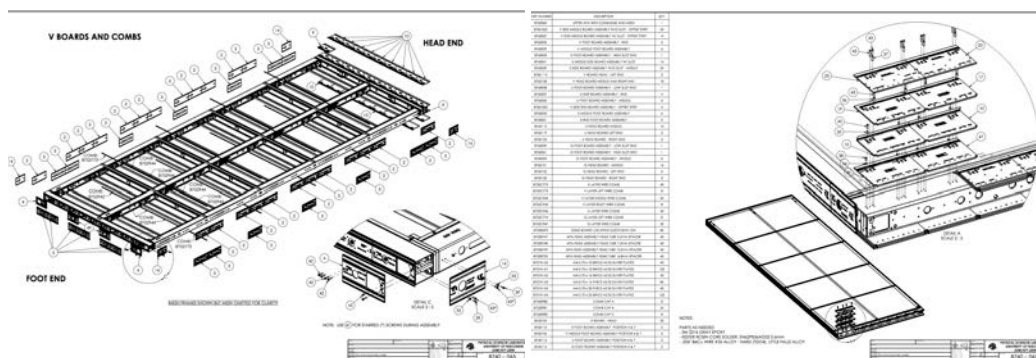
Engineering drawings that illustrate the layering of the wire carrier boards that are secured along the perimeter of the APA steel frames. Left: the full set of V -layer boards. Right: detail showing the stack of four boards at the head end of the APA (bottom to top: X, V, U, G).
